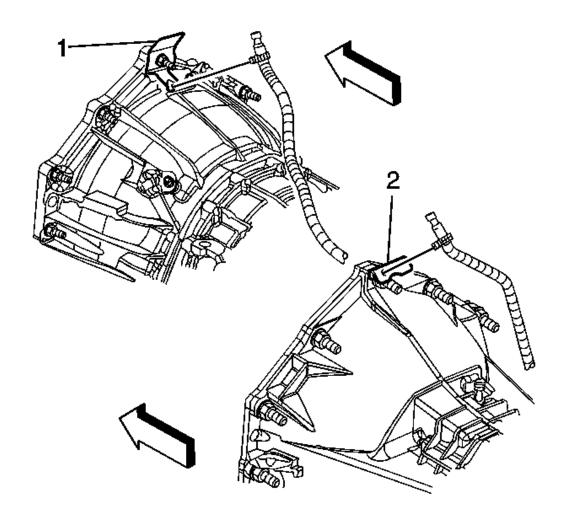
View Of Transfer Case Vent Hose Bracket & Nut Courtesy of GENERAL MOTORS CORP.
